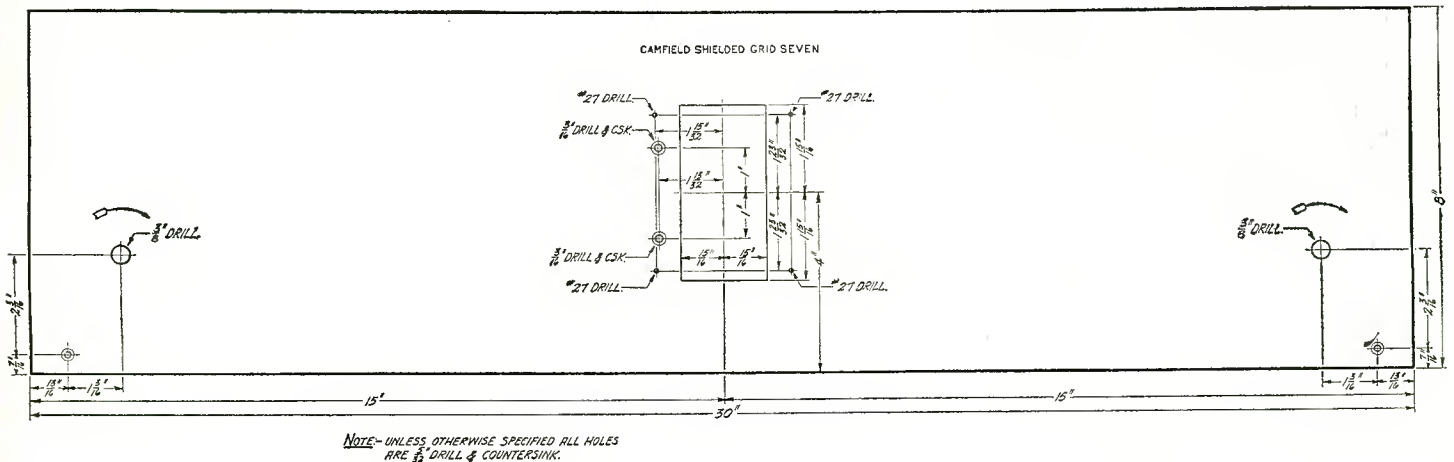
Dimensions for all holes and drill sizes are shown in the front panel illustration
